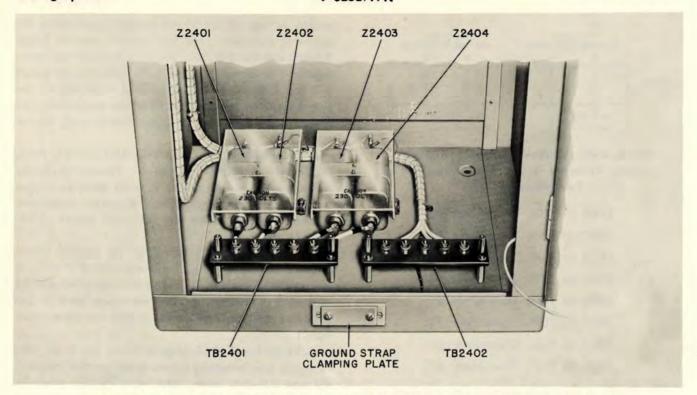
Voltage Regulator Assembly, Terminal Boards and Ground Terminal
